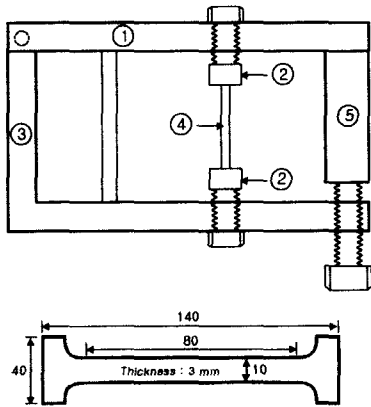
Cantilever-type crack testing apparatus and shape, dimension of crack test specimen ① movable axis, ② chuck, ③ frame, ④ specimen, ⑤ loading arm
